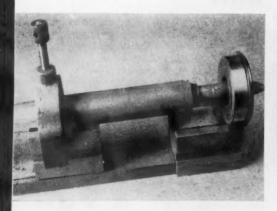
Setup for heating small bore ball bearing using electric soldering iron.
